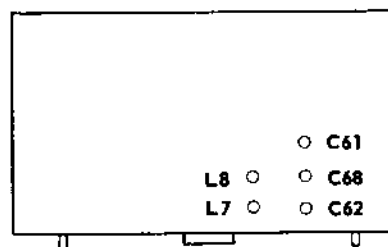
BOTTOM VIEW OF POWER SUPPLY SECTION
